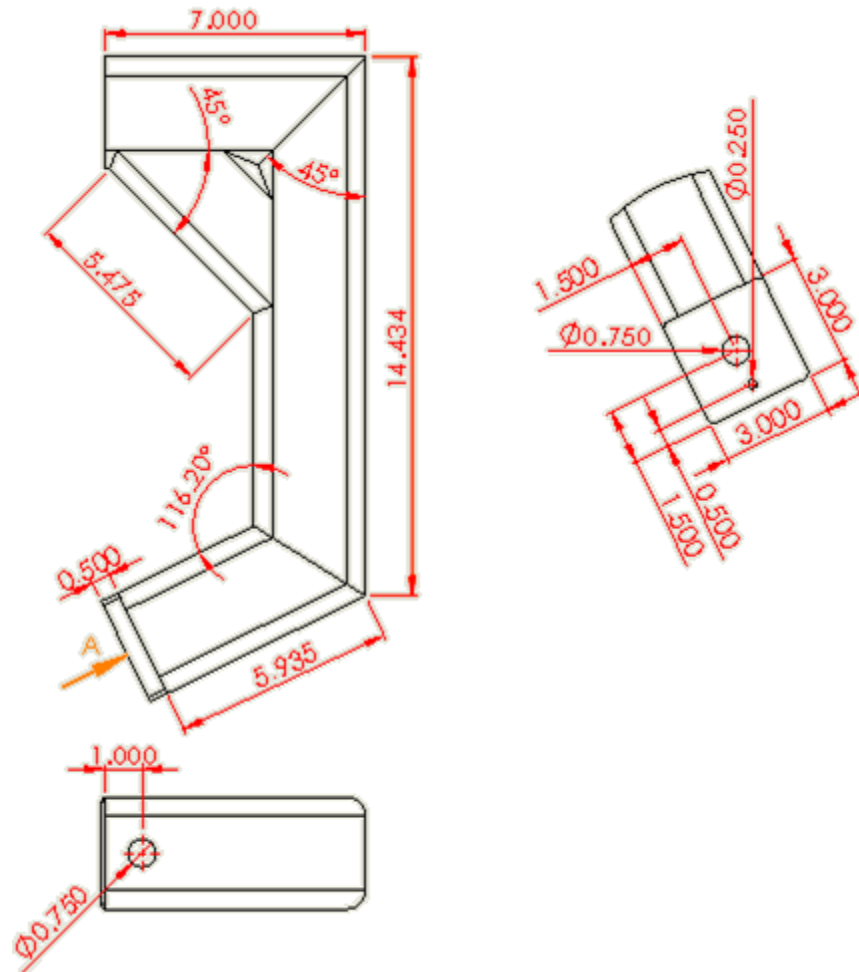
Wheel Load Test Rig Welded Arm
